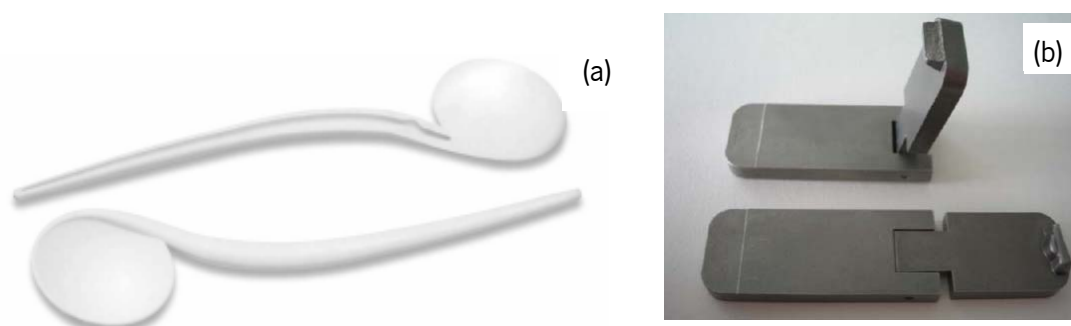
Examples of PIM parts moulded by gas-assisted ceramic injection moulding (a) and metal injection assembly-moulding (b) [97].
